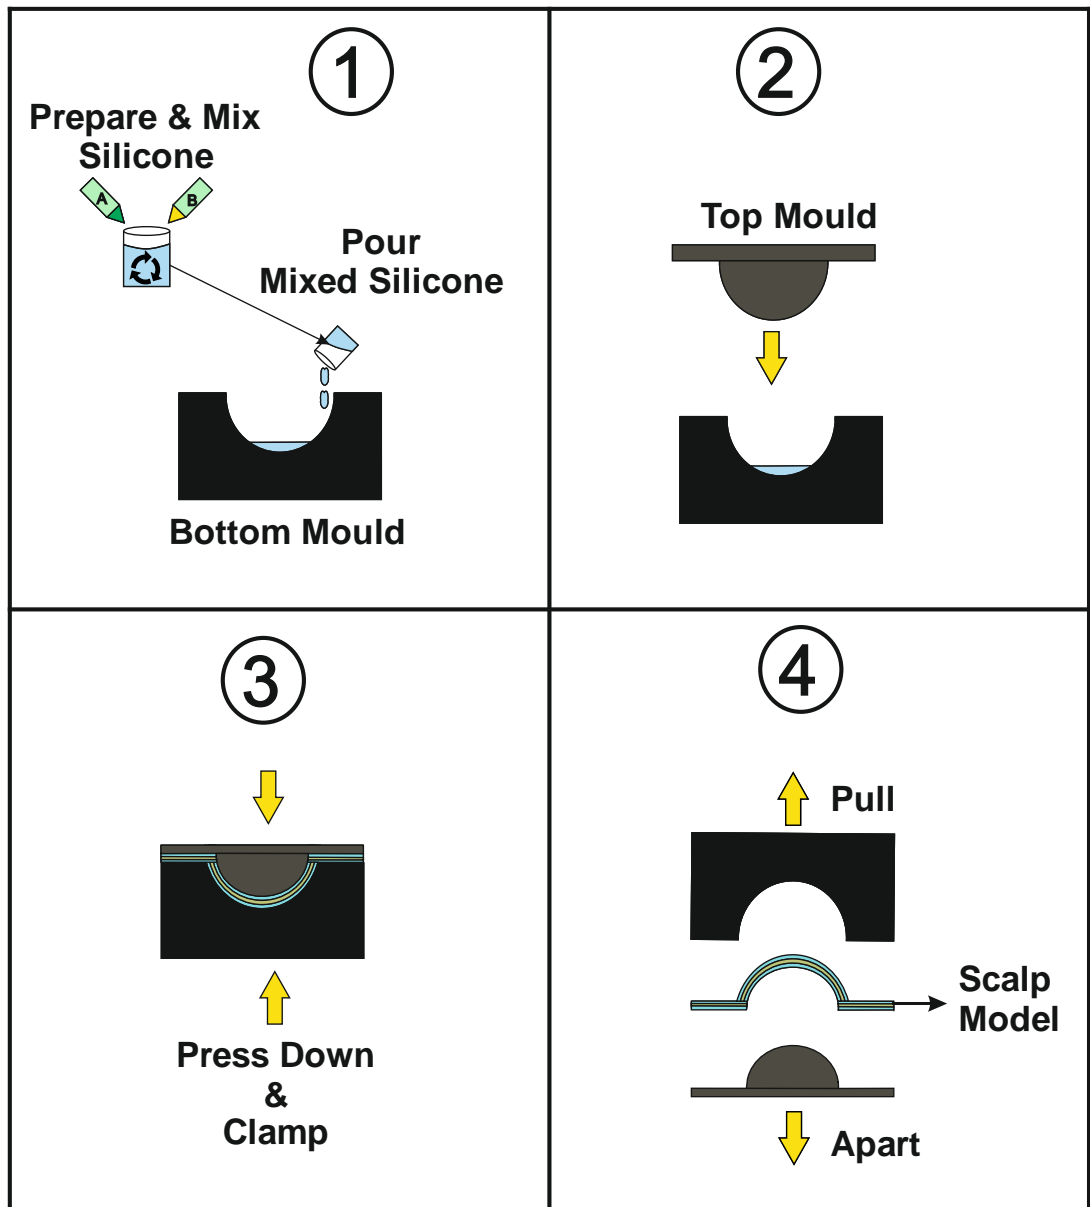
Fabrication steps to create a Scalp. Step 1: Silicone Preparation and Pouring, Step 2: Casting, Step 3: Curing Step 4: Demoulding Removal of top mould from bottom mould
